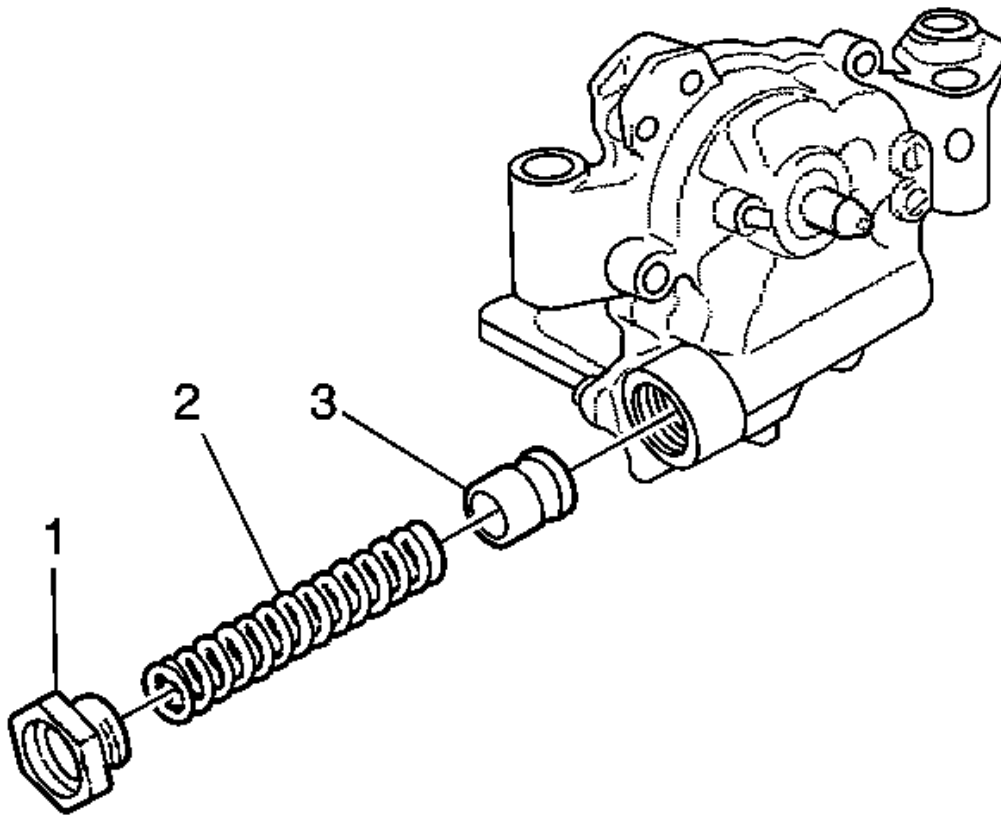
View Of Oil Pump Valve Spring & Relief Valve
